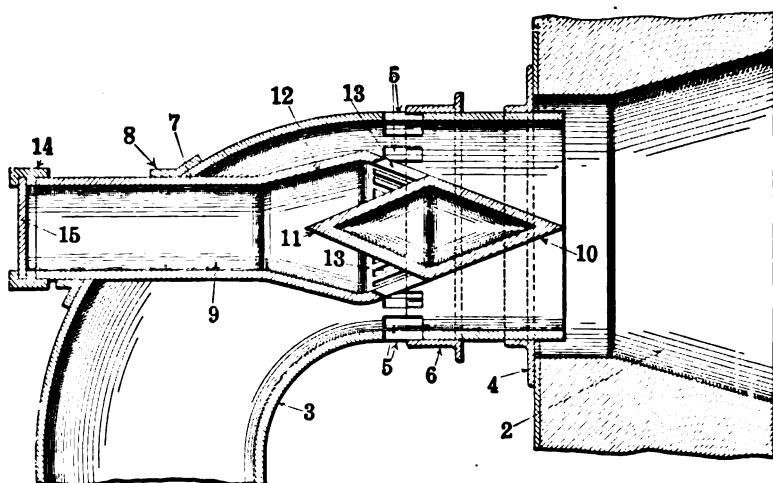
CUT THROUGH BRADSHAW STOVE BURNER.
